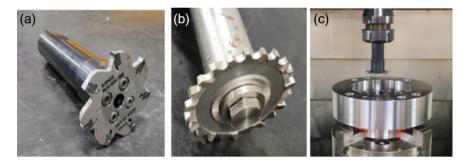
a Proposed Index-able Carbide cutter b existing HSS Slit cutter c machining operation is done with the proposed tool
